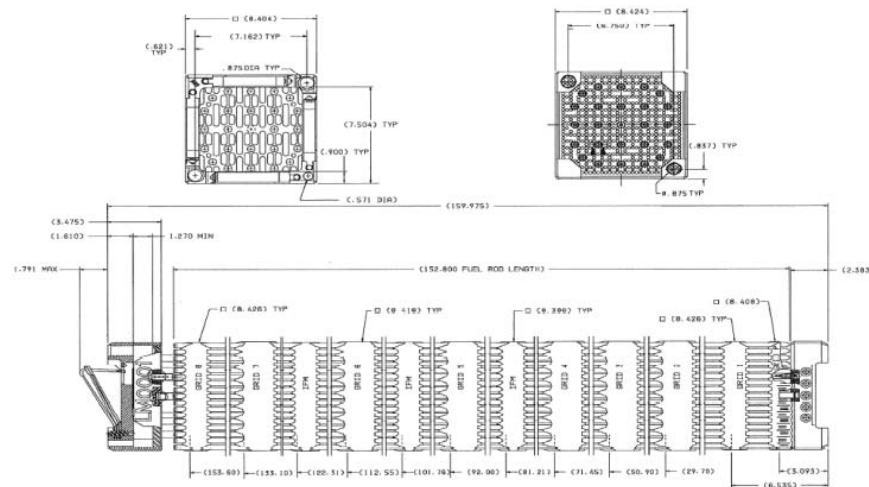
Westinghouse 17x17 Fuel Assembly [14]
